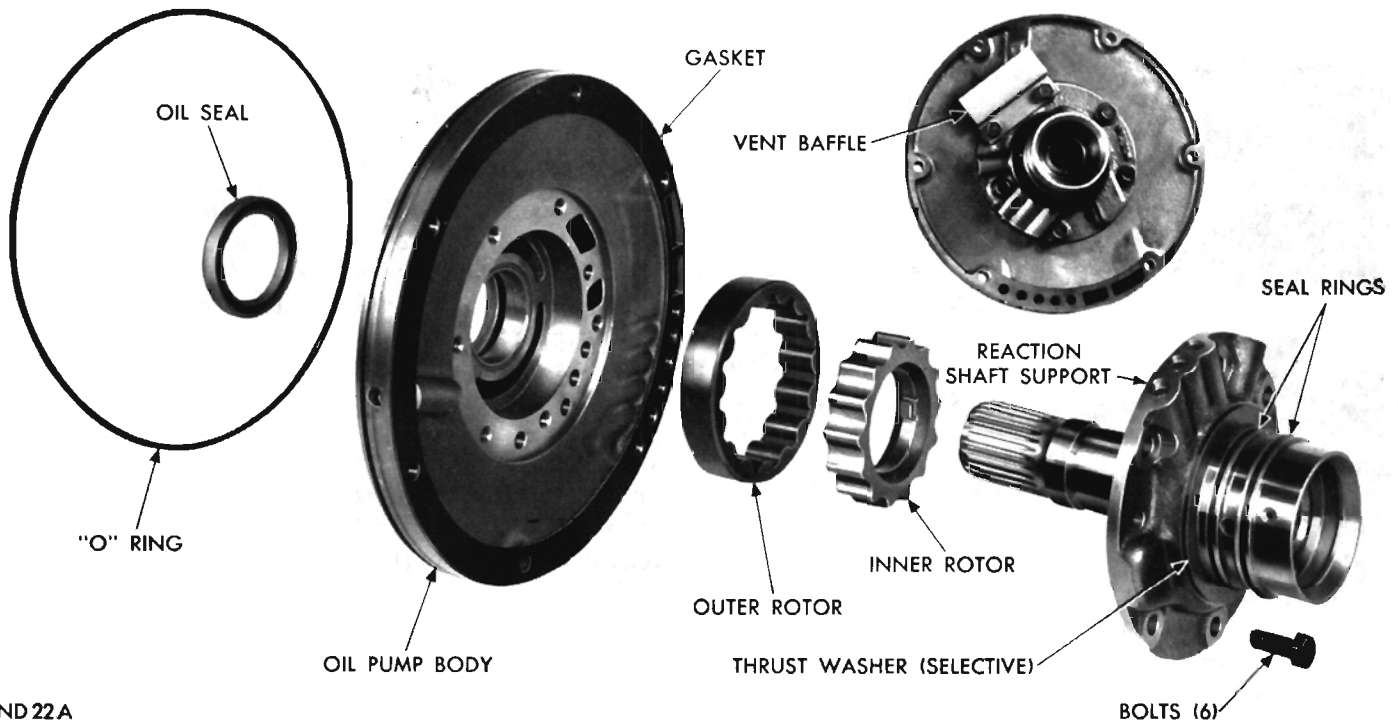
Oil Pump and Reaction Shaft Support (A-727)
